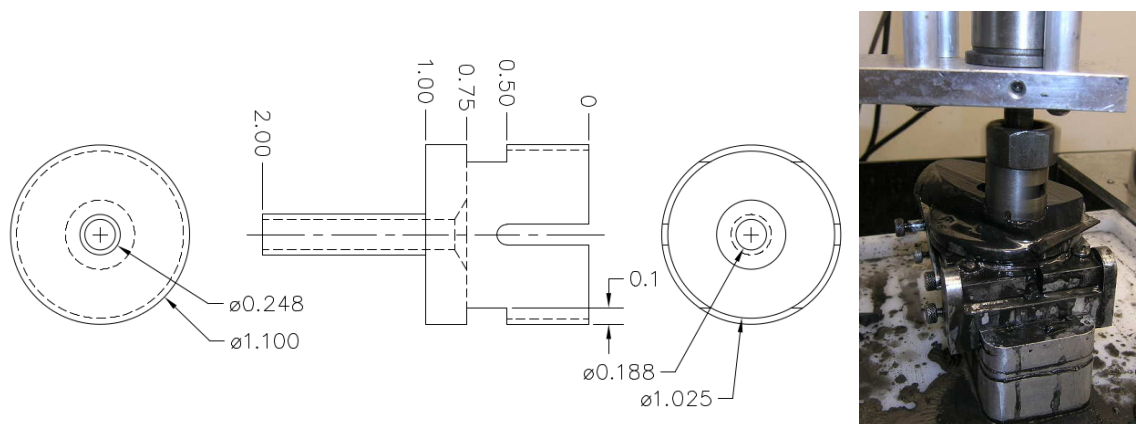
Core drilling of a 25 mm seed, and shop drawing of a cutting tool (Dimensions in inches)
